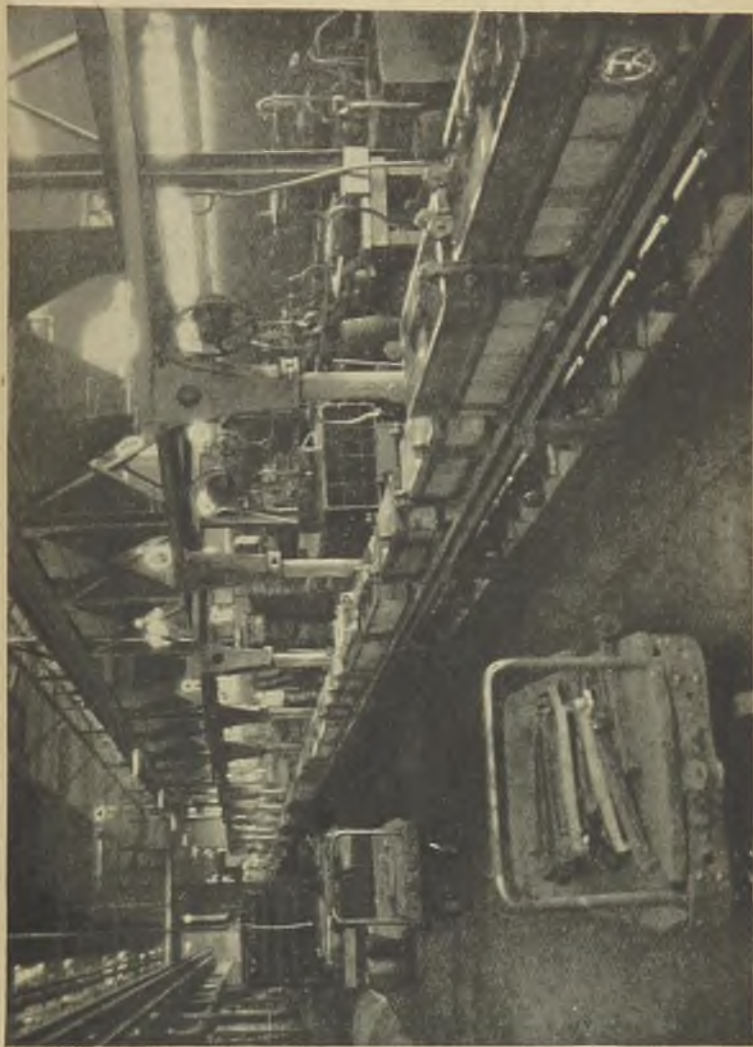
A POWER CONVEYOR UNIT FOR PRODUCING 2,100 CYLINDER CASTINGS IN NINE HOURS.
